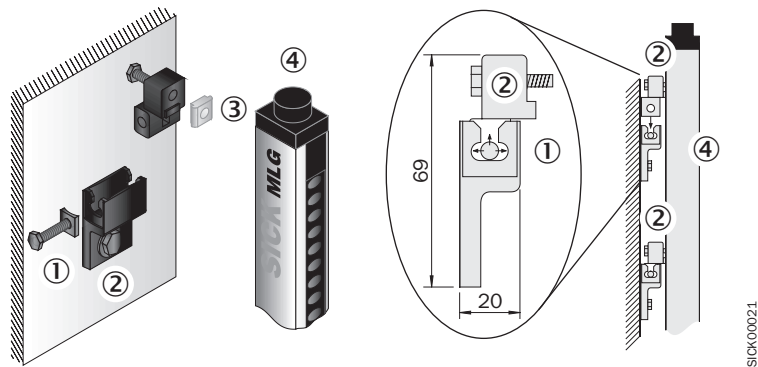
Mounting light grids with optional T-nuts and sliding nuts
